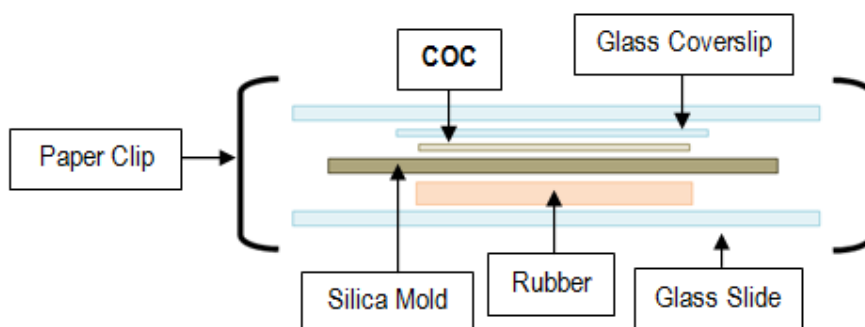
Paper clips-based hot embossing setup: the assembled components (COC film, silica mold, rubber, and glass coverslip and slides) were clamped together by two paper clips (which were used to generate pressure) and then heated to 190°C for 1h. COC: Cyclic Olefin Copolymer.
